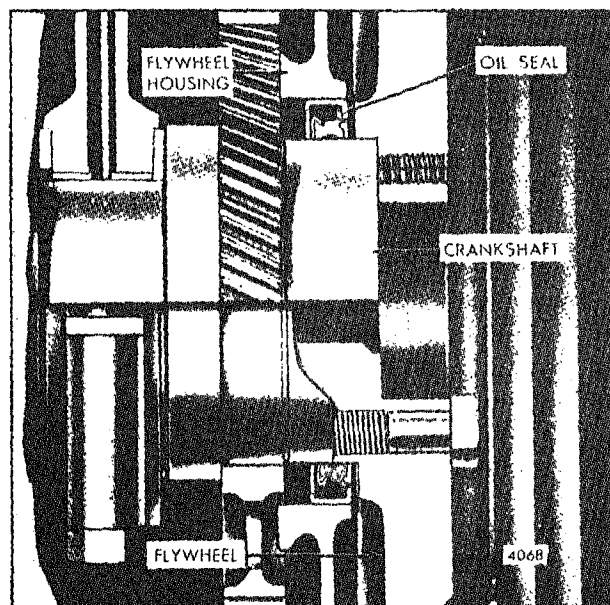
Crankshaft Rear Oil Seal (In-Line Engines)
